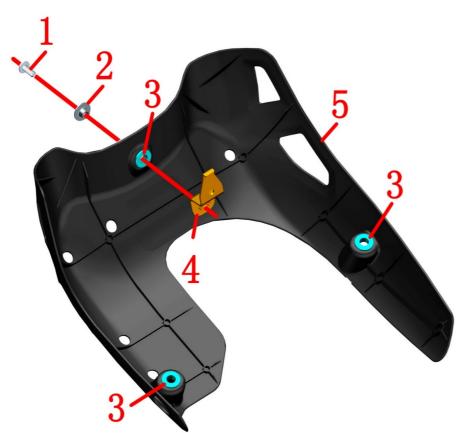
LOWER SHROUD		Lower shroud component 2	СНК
